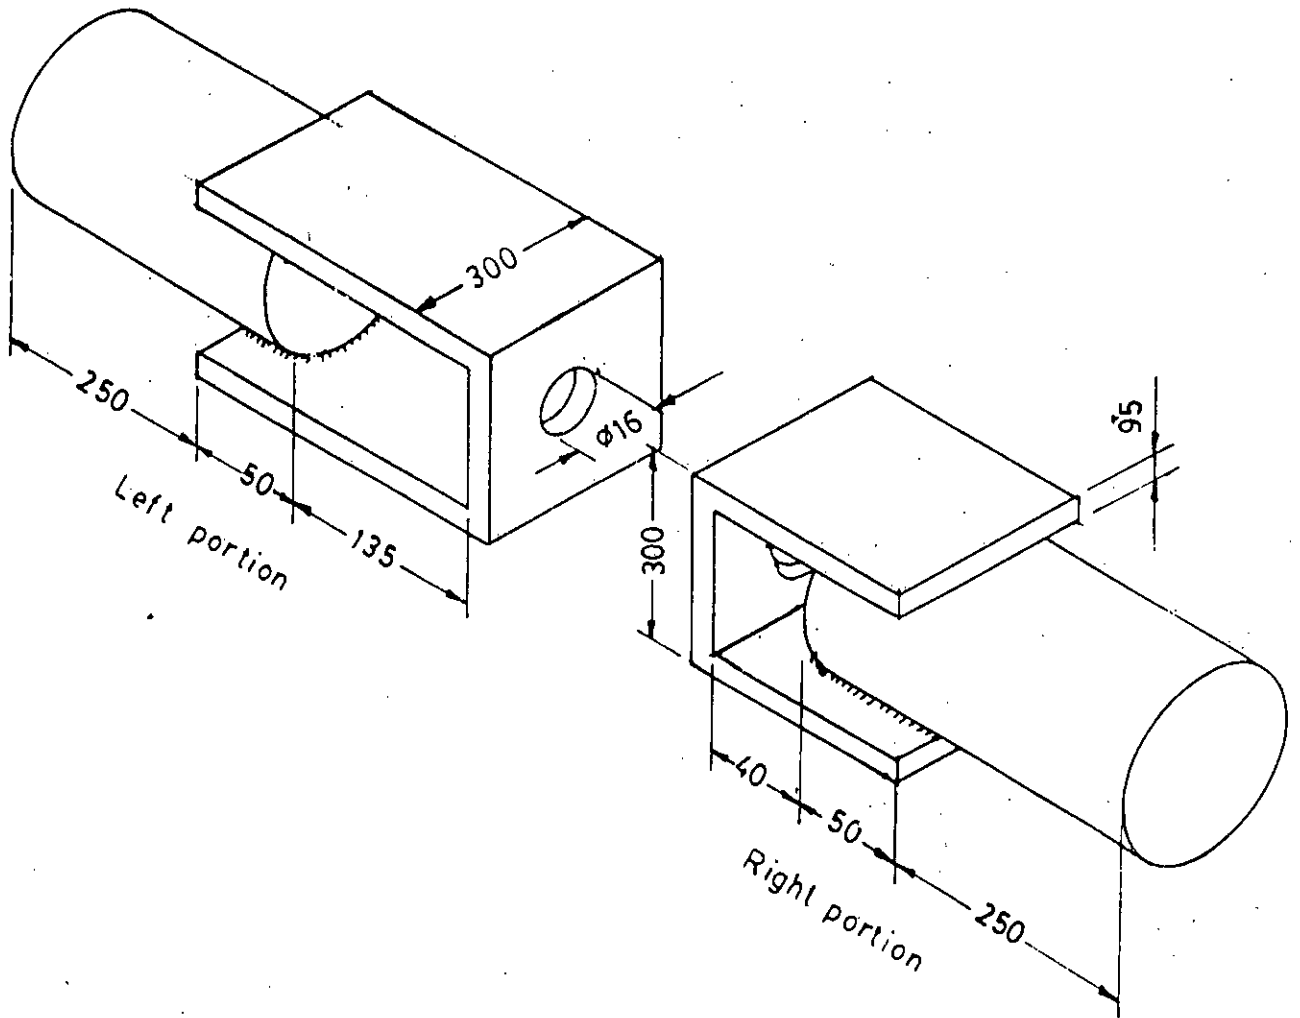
a) Fixture for the tensile testing of allen key bolt and nut.
